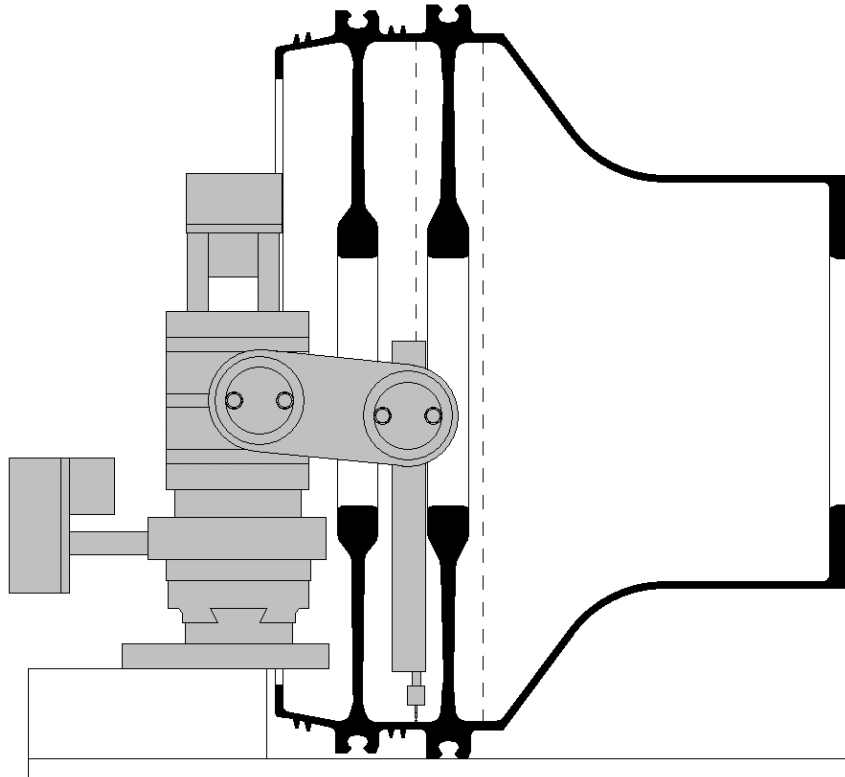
Schematic view of the assembly and driller set up to drill at the front weld ID
